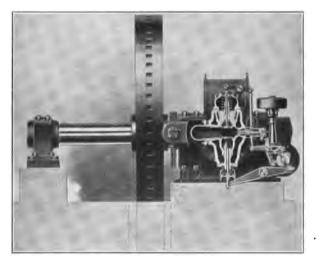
Section Through Combustion Chamber. De La Vergne F. H. Engine.
